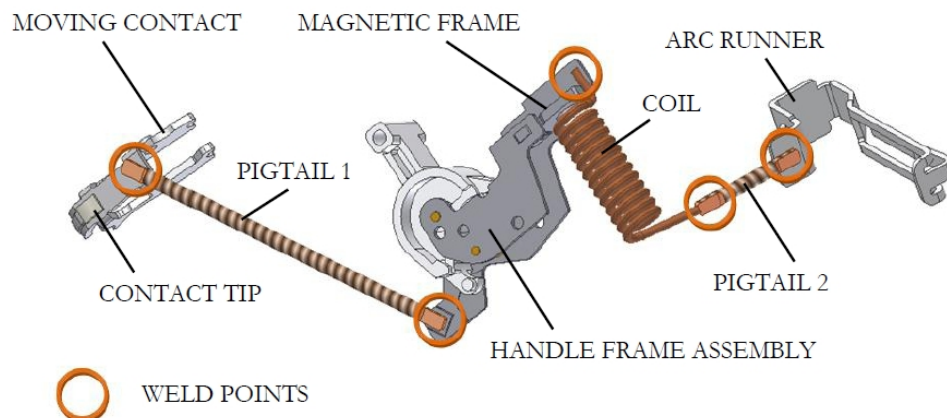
Q-frame breaker mechanism assembly (Sequeira, 2008).
